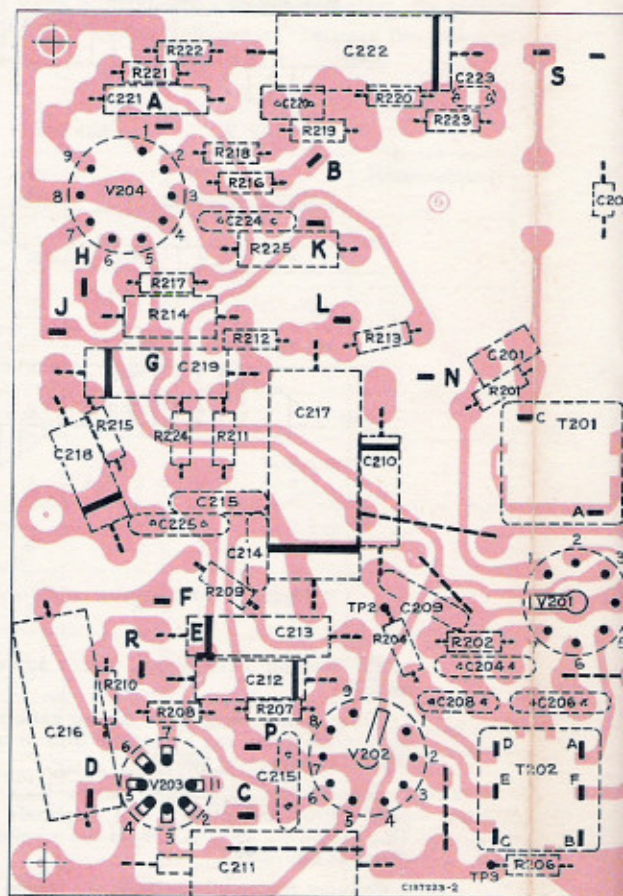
PW200 Sound I-F & Audio Assembly Layout
